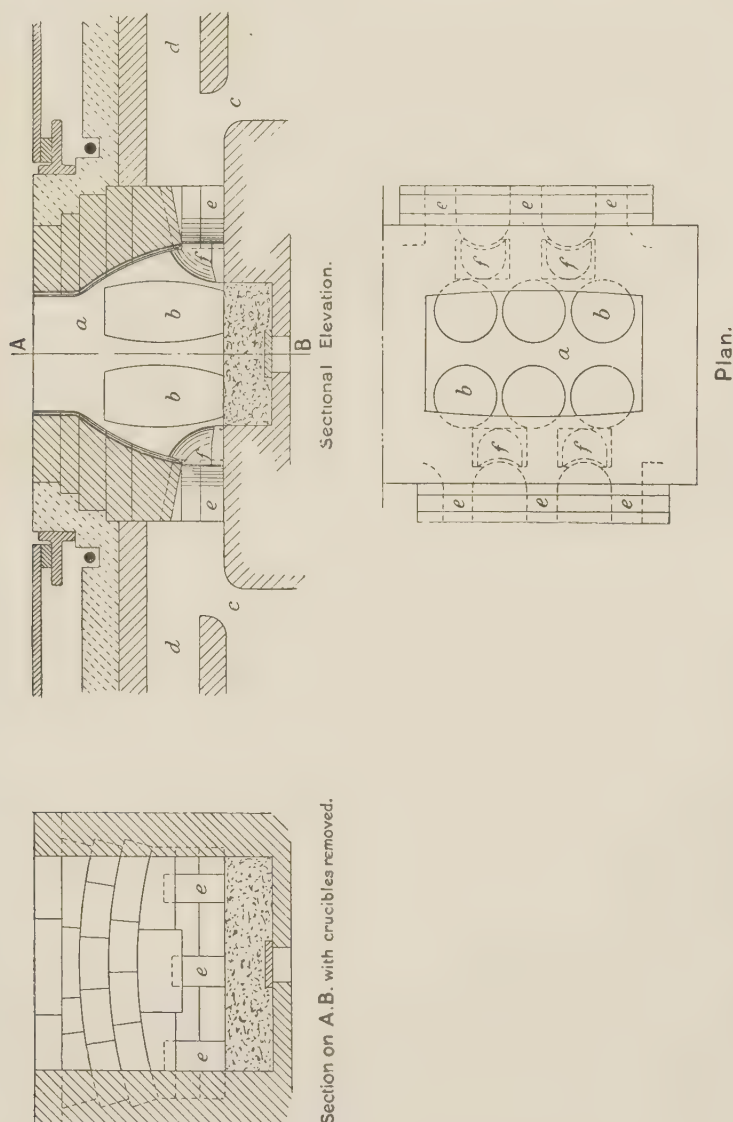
Details of Melting Hole of Siemens Gas-fired Crucible Furnace.
